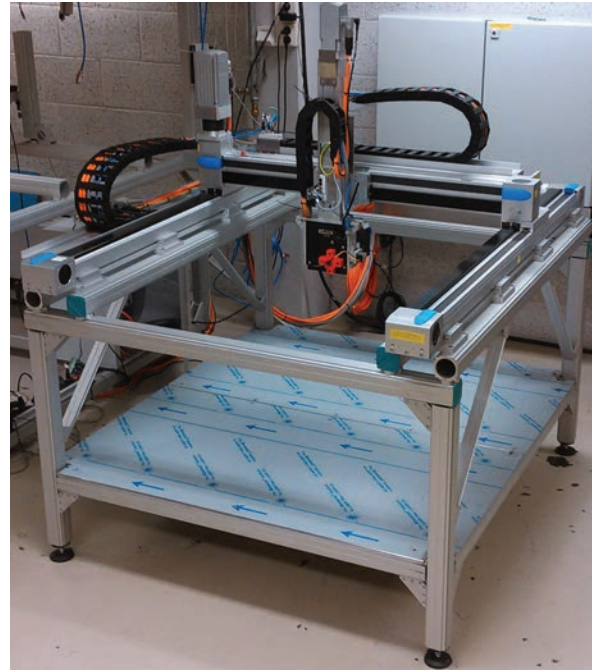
Machine for testing set up in the laboratory. Three linear axes control the 3D position of a galvanometer-based laser scan-head. A visible laser is mounted with the galvanometer scanner for visual inspection of the executed task.
